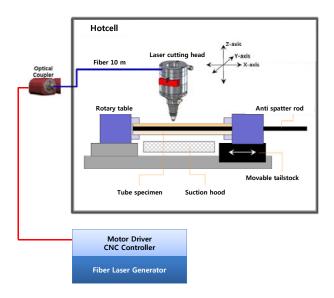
Concept design of the laser cutting machine for fabrication of irradiated tube specimens in hotcell.
